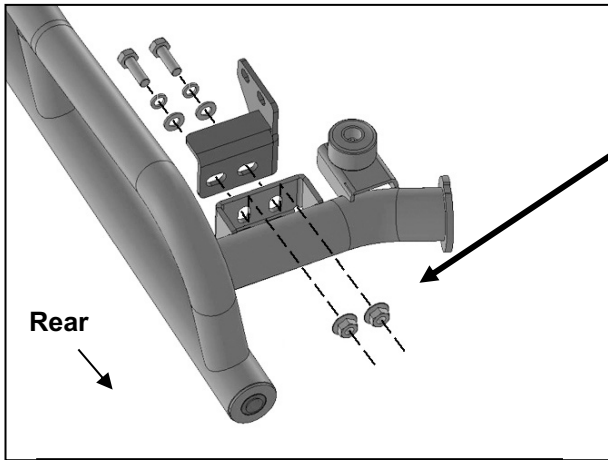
Models with suspension lift “spacer,” attach Adjustable Mounting Plate on end of Rocker Slider to rear Frame Bracket
